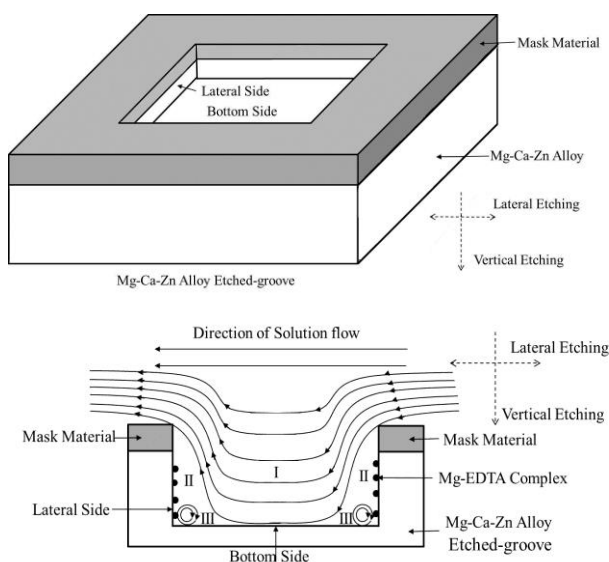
a perspective view and b cross-sectional view of the mechanism diagram of electrochemical etching.
